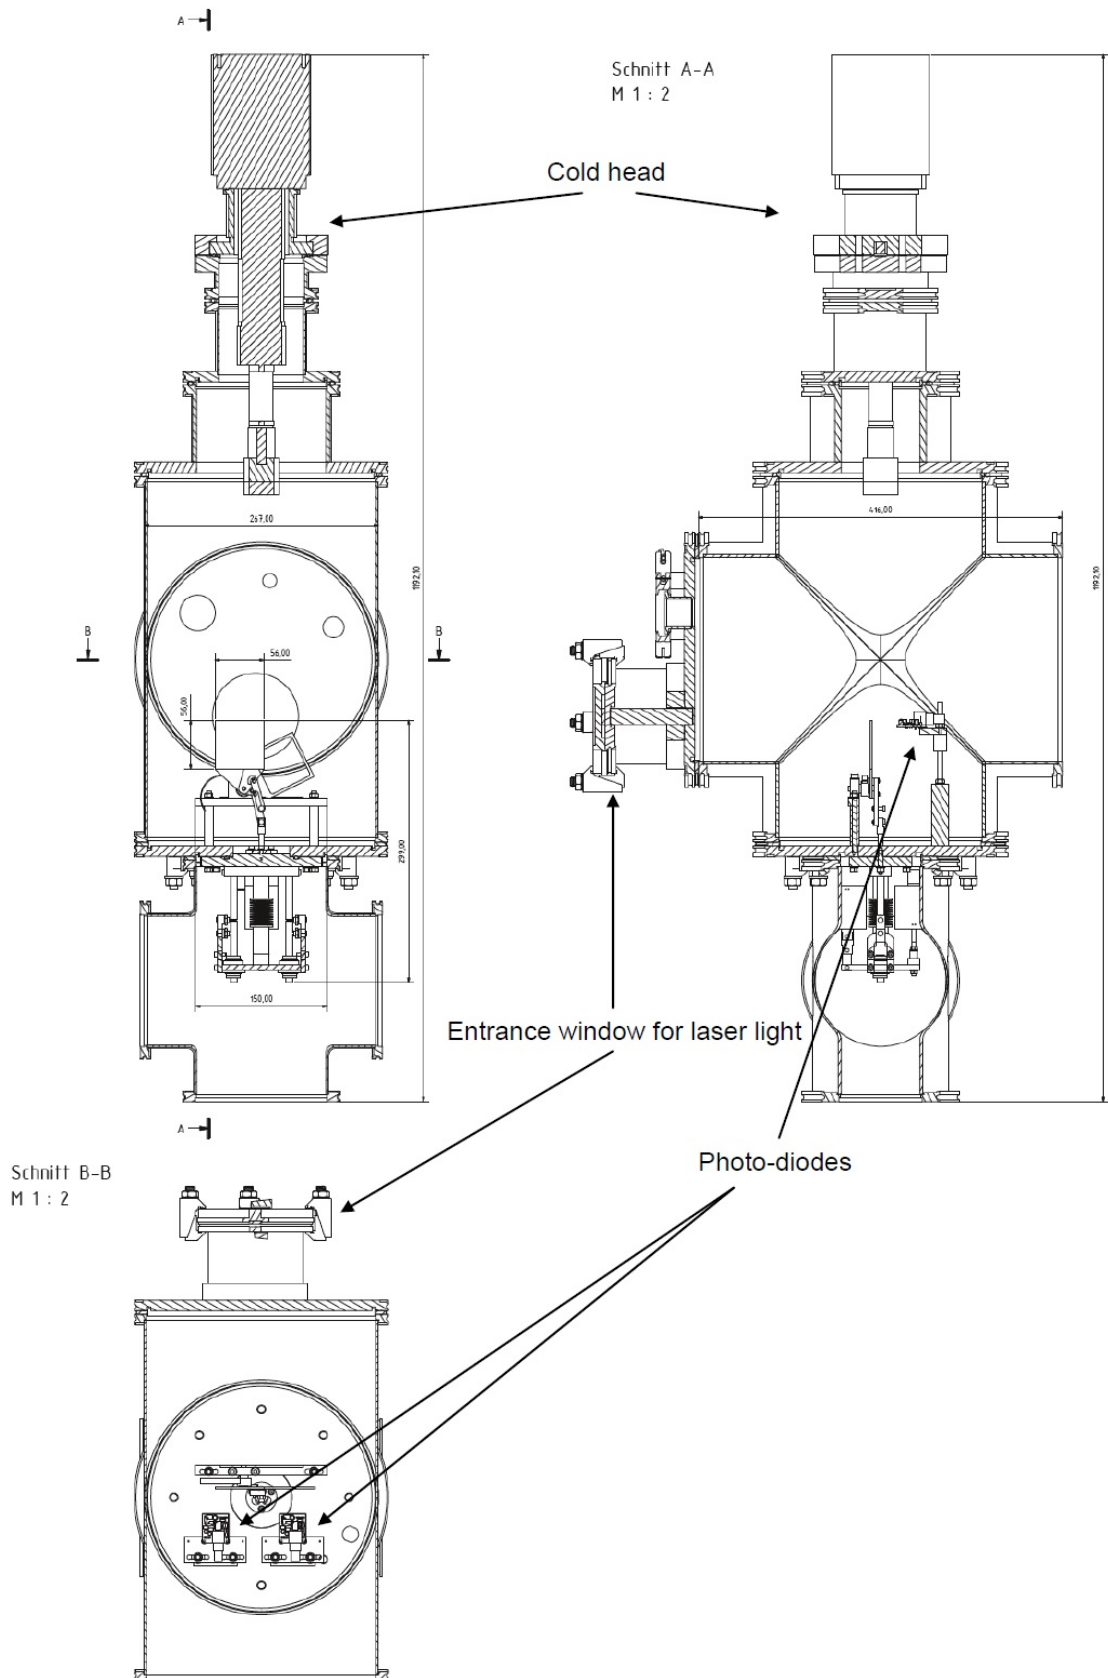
Technical drawing of the shutter test setup as shown in Fig. 4.4 and Fig. 4.5. Drawn by Doris Stückler (SMI).
